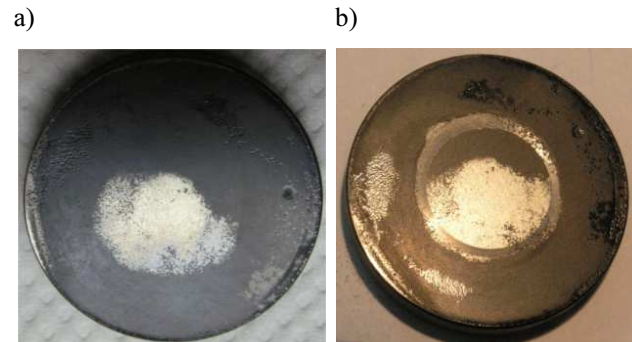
Push rod with coating after grinding, before (a) and after (b) 10 h of testing on test stand
